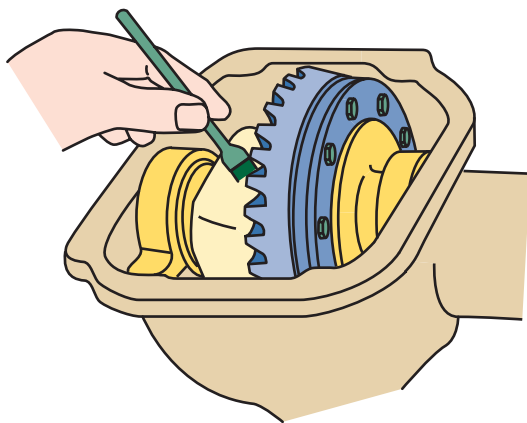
To check gear tooth patterns, several teeth of the ring gear are coated with a marking compound and the pinion gear is rotated with the ring gear. The resultant pattern shown on the teeth determines how the gear-set ought to be adjusted.
